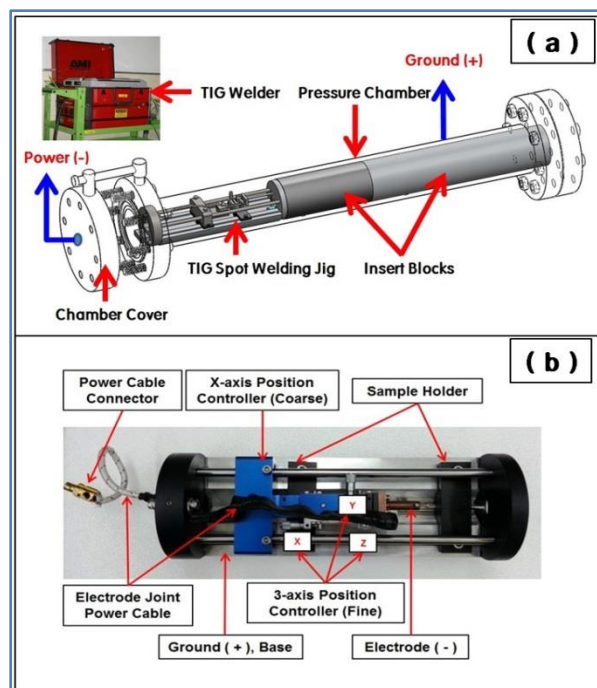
Gas filling system: (a) The configuration of a spot welding system used to fill helium gas and (b) TIG spot welding jig to hold a nuclear fuel test rod.
